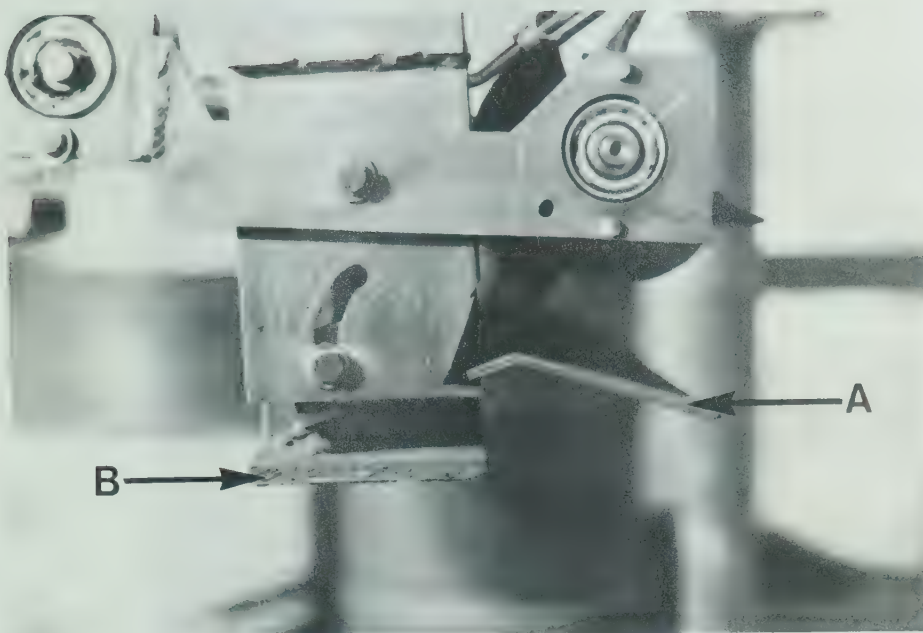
Vibrator - Shear blade (A), Compacting plate (B).
